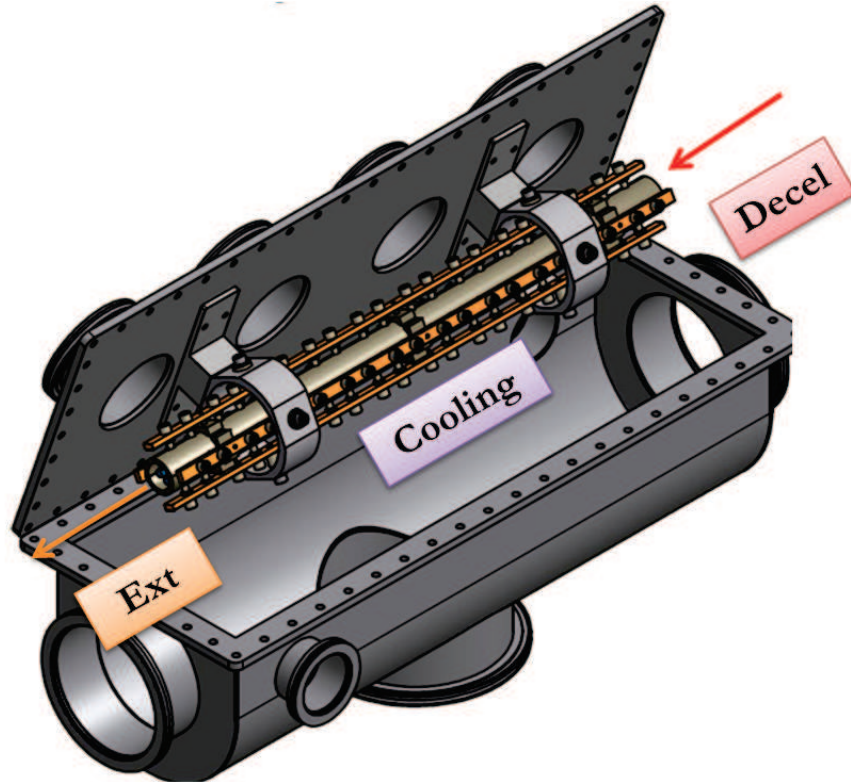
Layout of the quadrupole structure under construction at LNL.
